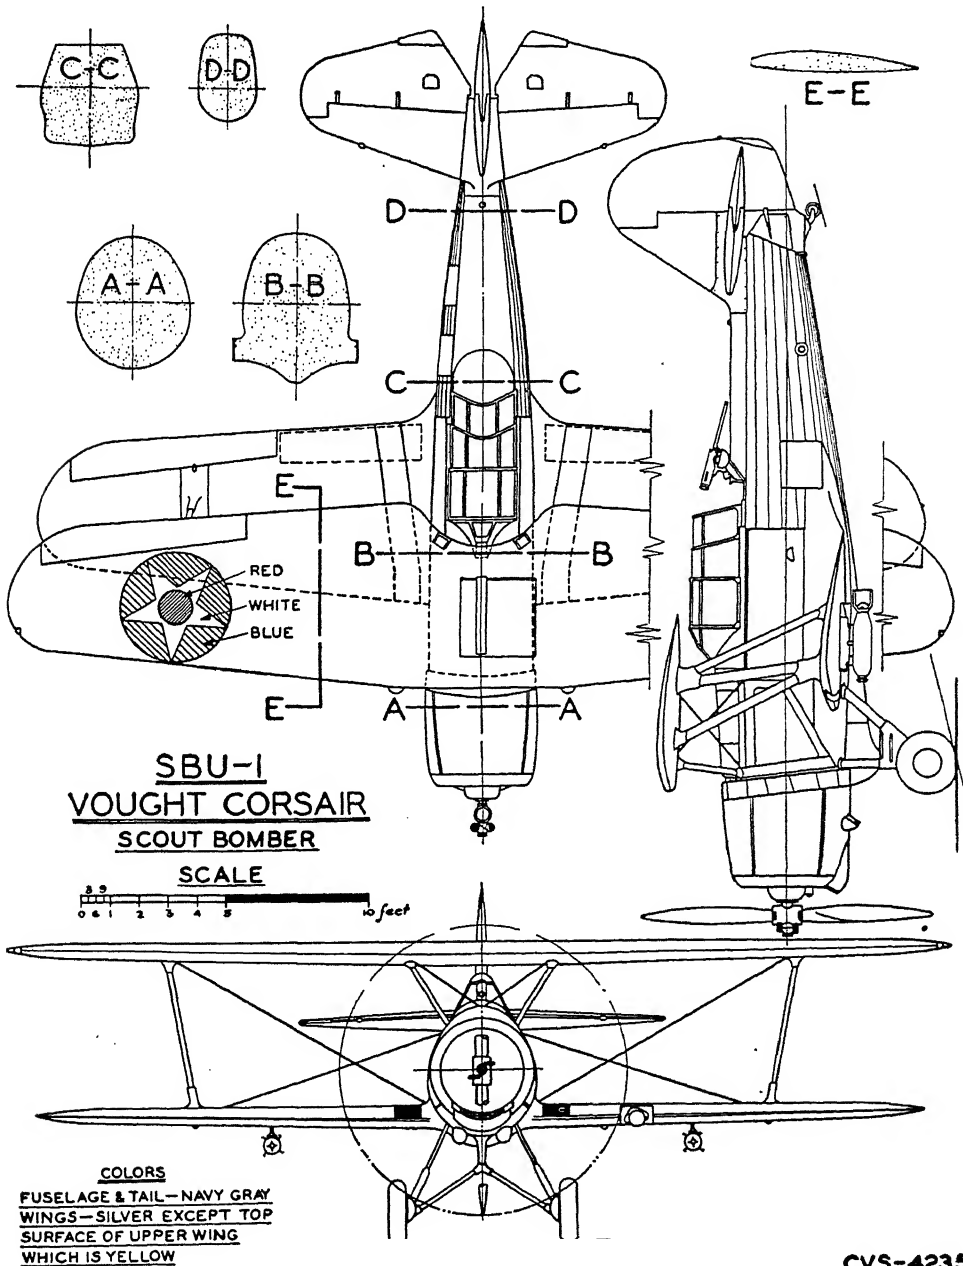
Outline Drawing of Scout Bomber of Fig. 12-9. Prob. 14-3.
